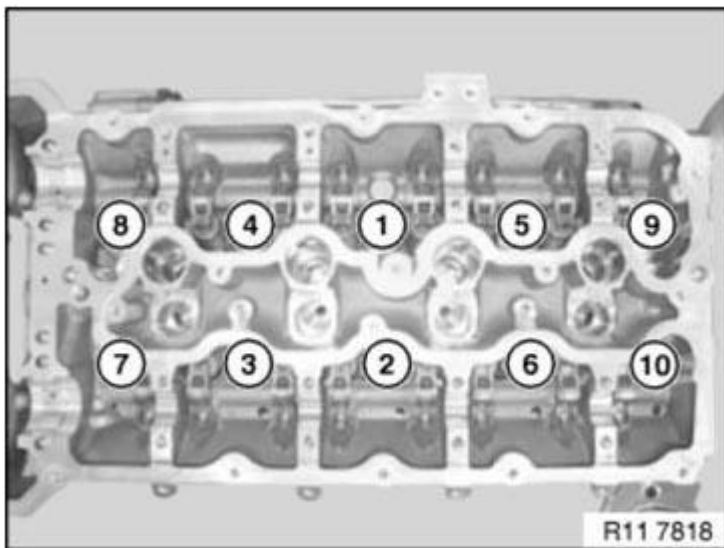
Identifying Cylinder Head Bolts Releasing Sequence
